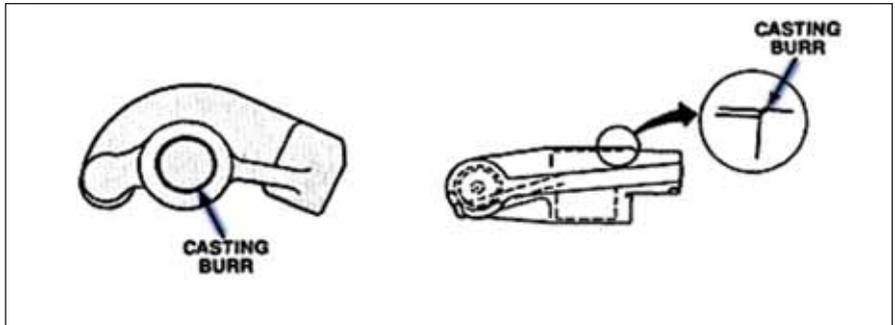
Inspect the rocker arm surface that contacts the cam shaft bearing cap for casting burrs. If casting burrs are found, perform the repair procedure.
